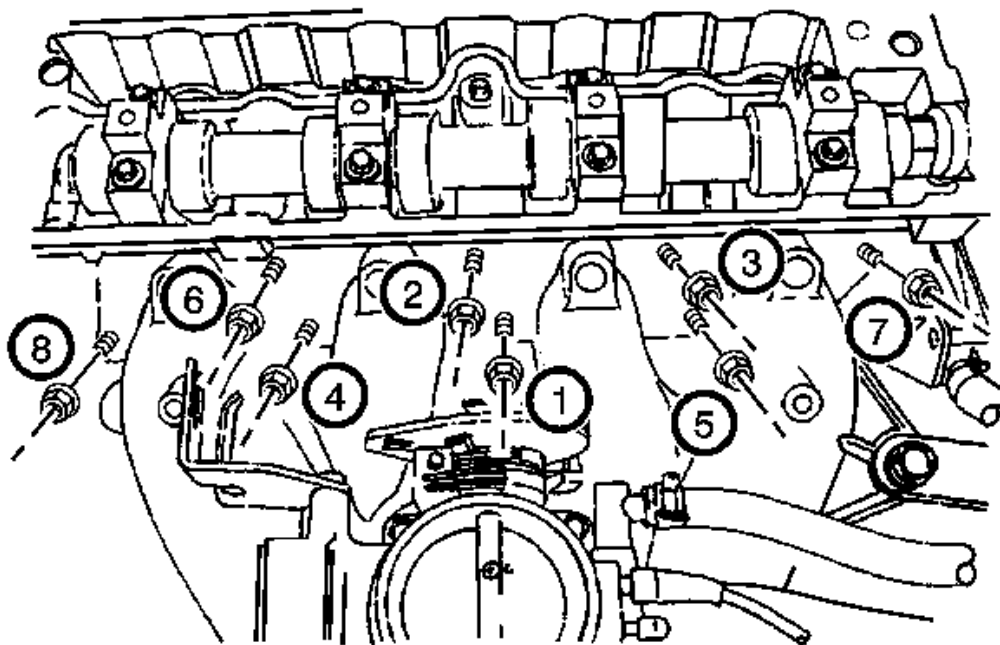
View Of Intake Manifold Retaining Bolt Installation Sequence
